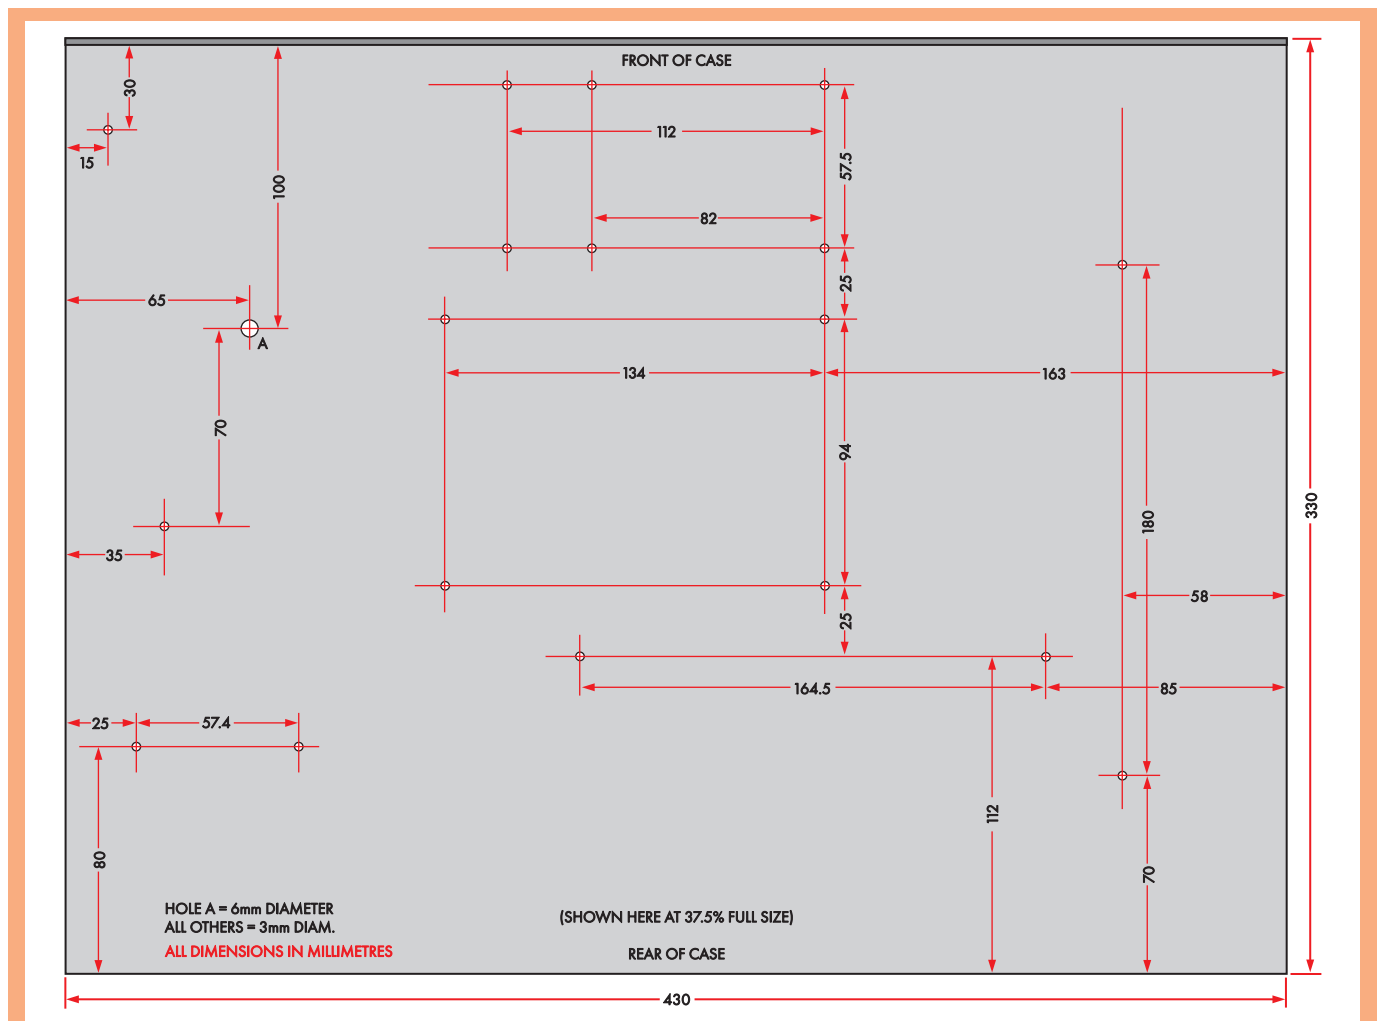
mark & drill the base of the Altronics 2RU case as shown. Drill the holes to 3.5mm for mounting locations; if you need extra wiggle room, you can drill or file them to 4mm. If using a different case, you will have to make adjustments.
